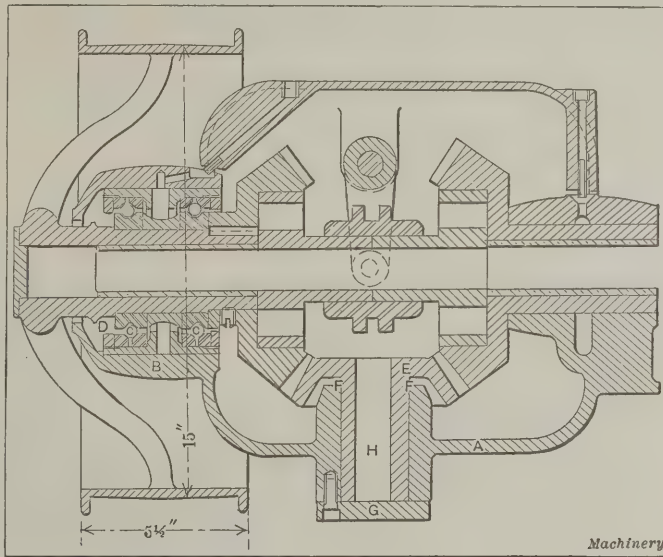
Reversing Mechanism of Reed-Prentice Lathe
